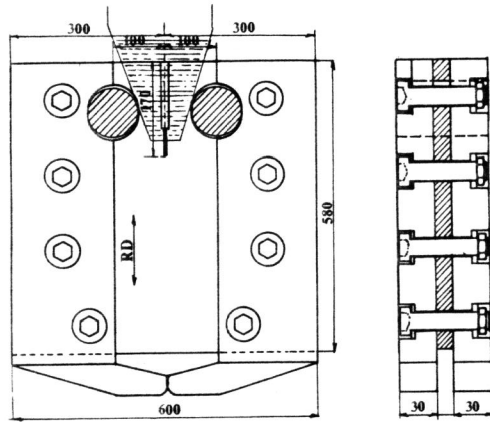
Wlsen - Specimen, Provided with Stiffeners Hinge
